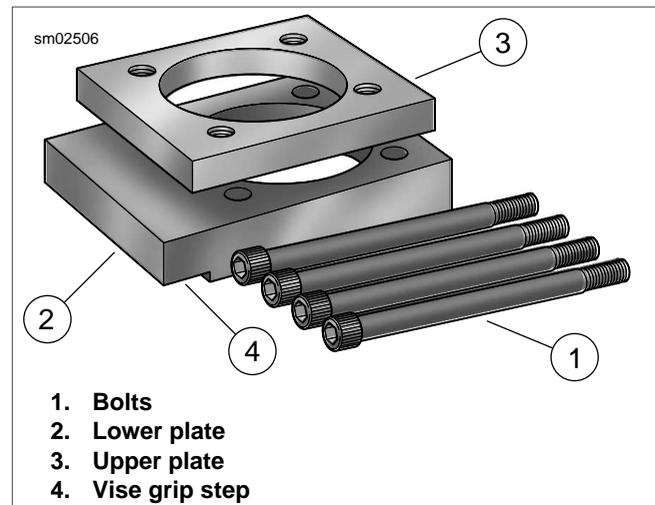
Cylinder Torque Plates (Part No. HD-42324-A)
